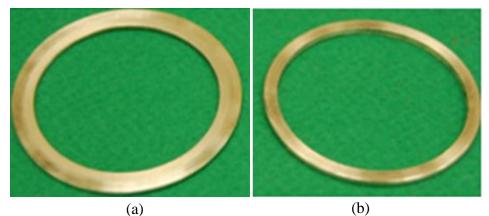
(a) The bottom aluminum ring to keep the bottom of spring, (b) The top aluminum ring to fix the top of spring.
